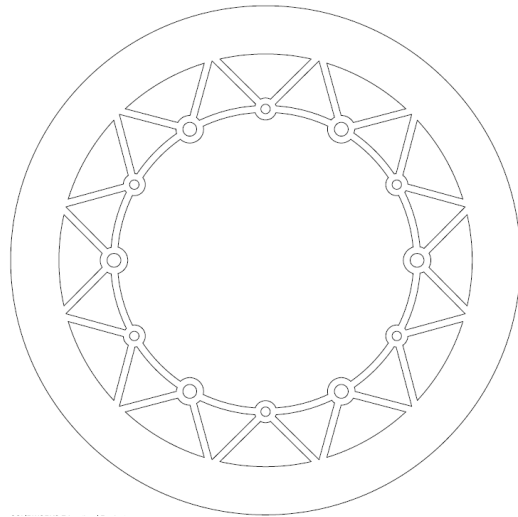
The individual mould layer profile, featuring outer material to be machined down, holes to clamp the mould together, and mass saving where possible to improve the mould ergonomics.
